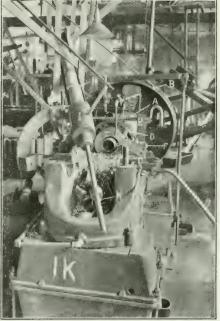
TRANSFORMED GAS ENGINE DOING DUTY AS CUTTING-OFF MACHINE
